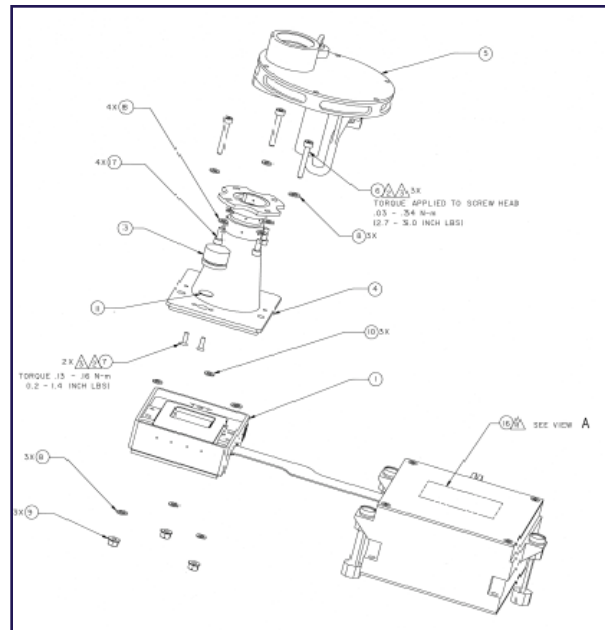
Schematic of the MER Pancam instrument. The instrument consists of a filter wheel, motor and housing (top), optics lens barrel assembly (middle left), CCD housing assembly (lower left), and a separate box containing the FPGA and other electronics (bottom). For scale, the electronics box is ~6.5 cm long.
